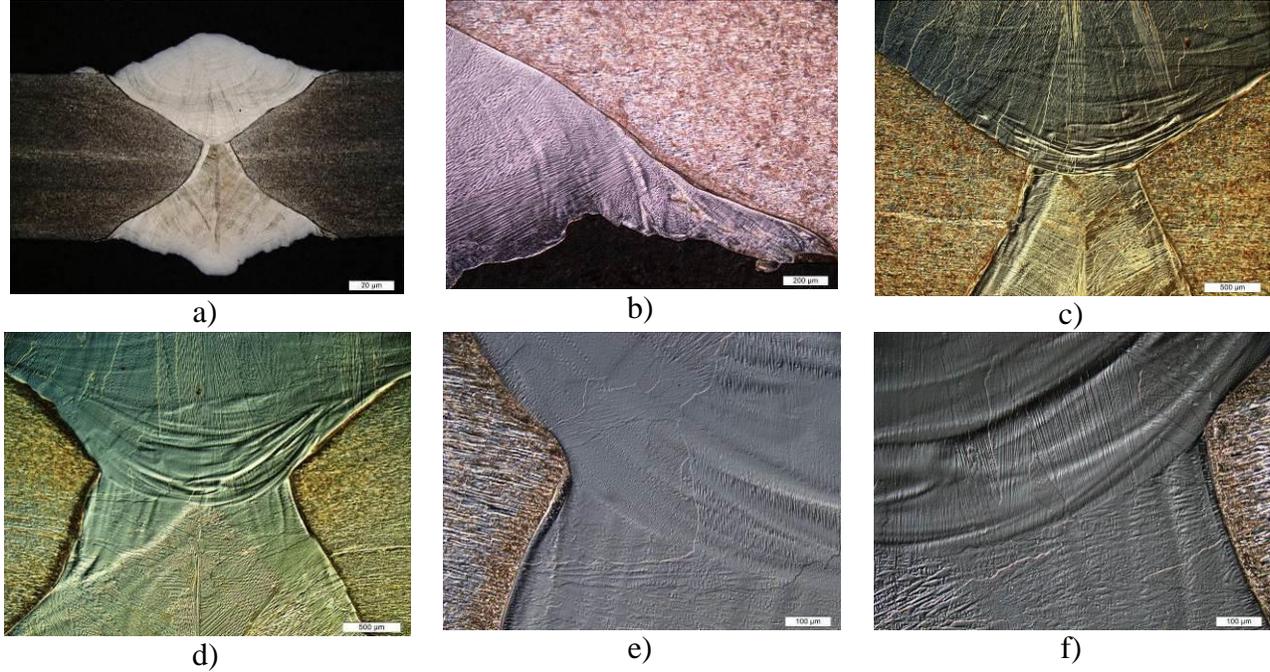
ENiCuRu Test Weld Assemblies: a) Macrostructure; b) Undercut; c) through f) Macro- and Micro-structure in the Weld Root Zone
